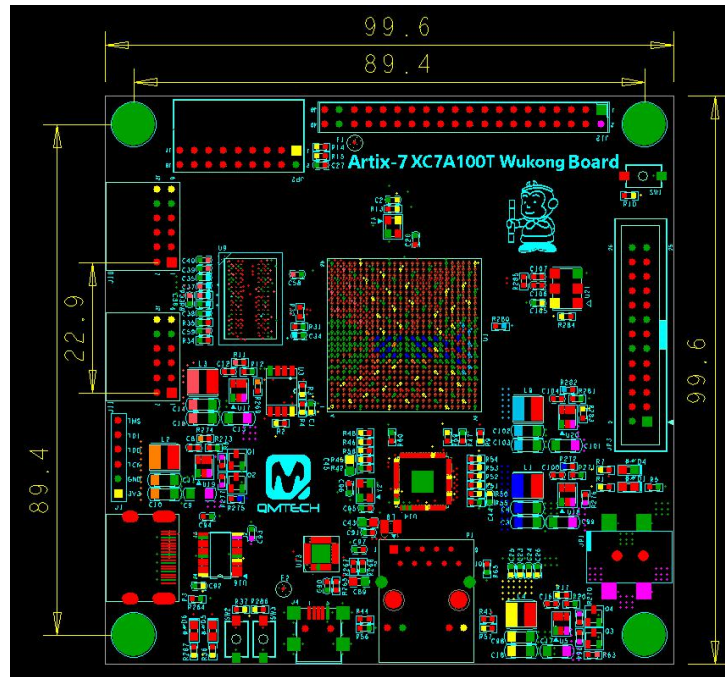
QMTECH XC7A100T Wukong Board Dimension
